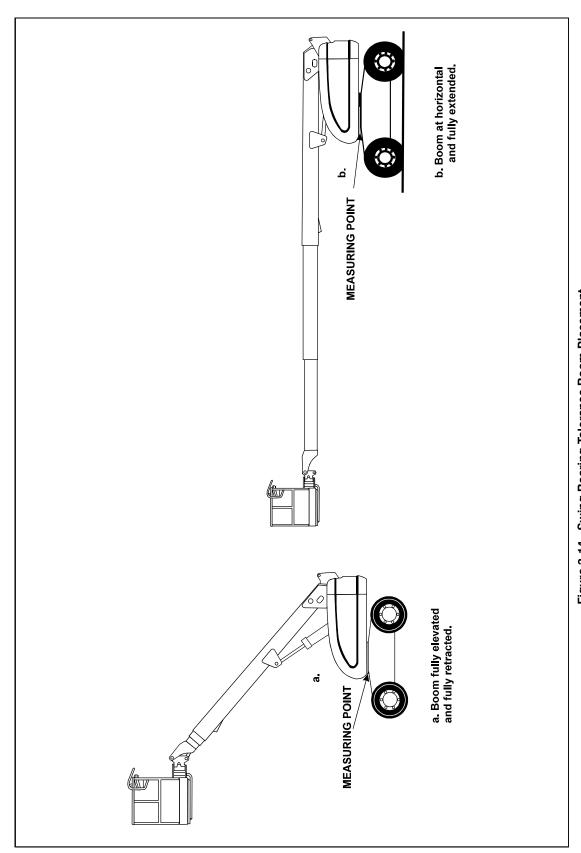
Swing Bearing Tolerance Boom Placement
